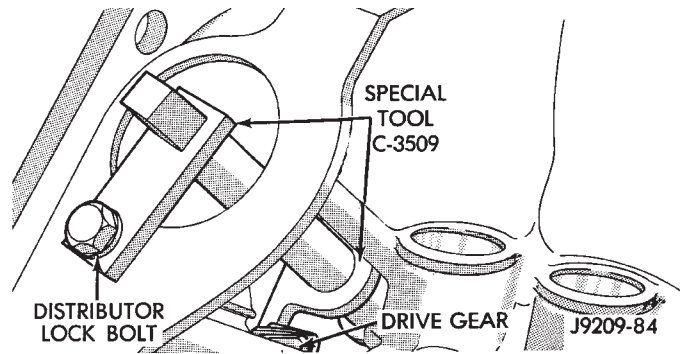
Camshaft Holding Tool C-3509 (Installed Position)
